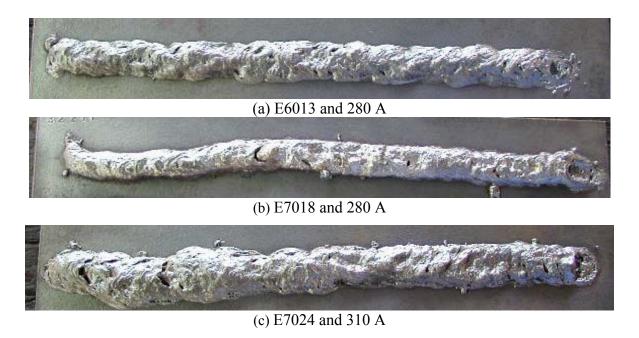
Pictures of the bead-on-plate wet welds deposited with the three electrode types with electrode positive on API 5L Gr. B steel plates at 100 m.
